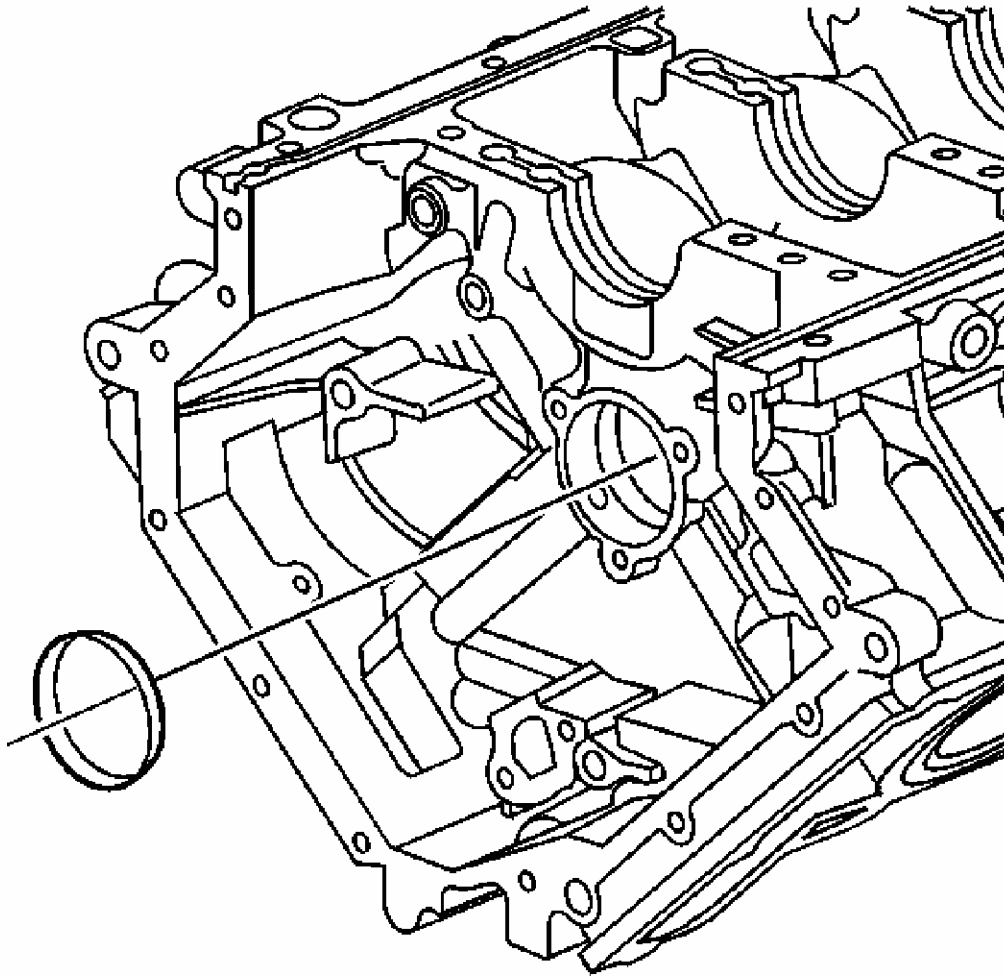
View Of Camshaft Intermediate Shaft Plug
